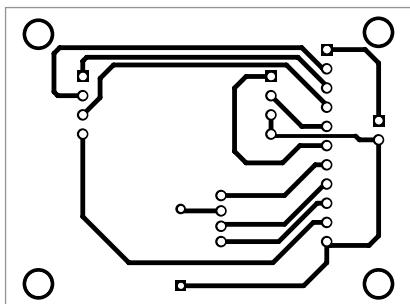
Actual-size PCB layout of the RGB colour detector using TCS3200
